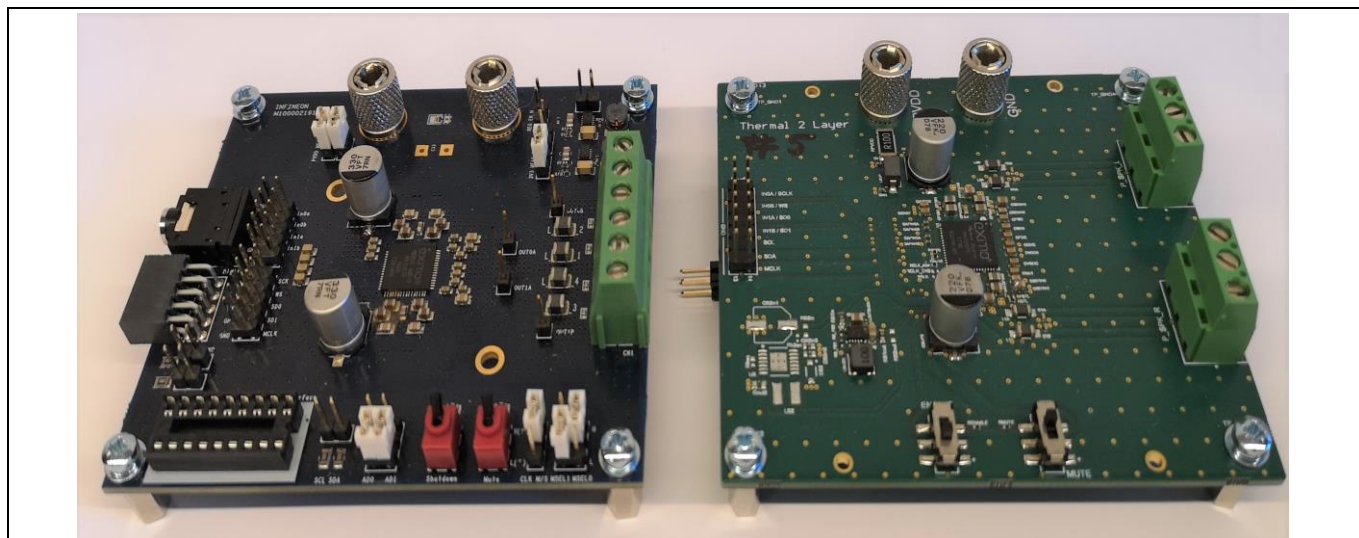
Two-layer 1 oz PCB (EVK) (left), two-layer 2 oz PCB (right)
